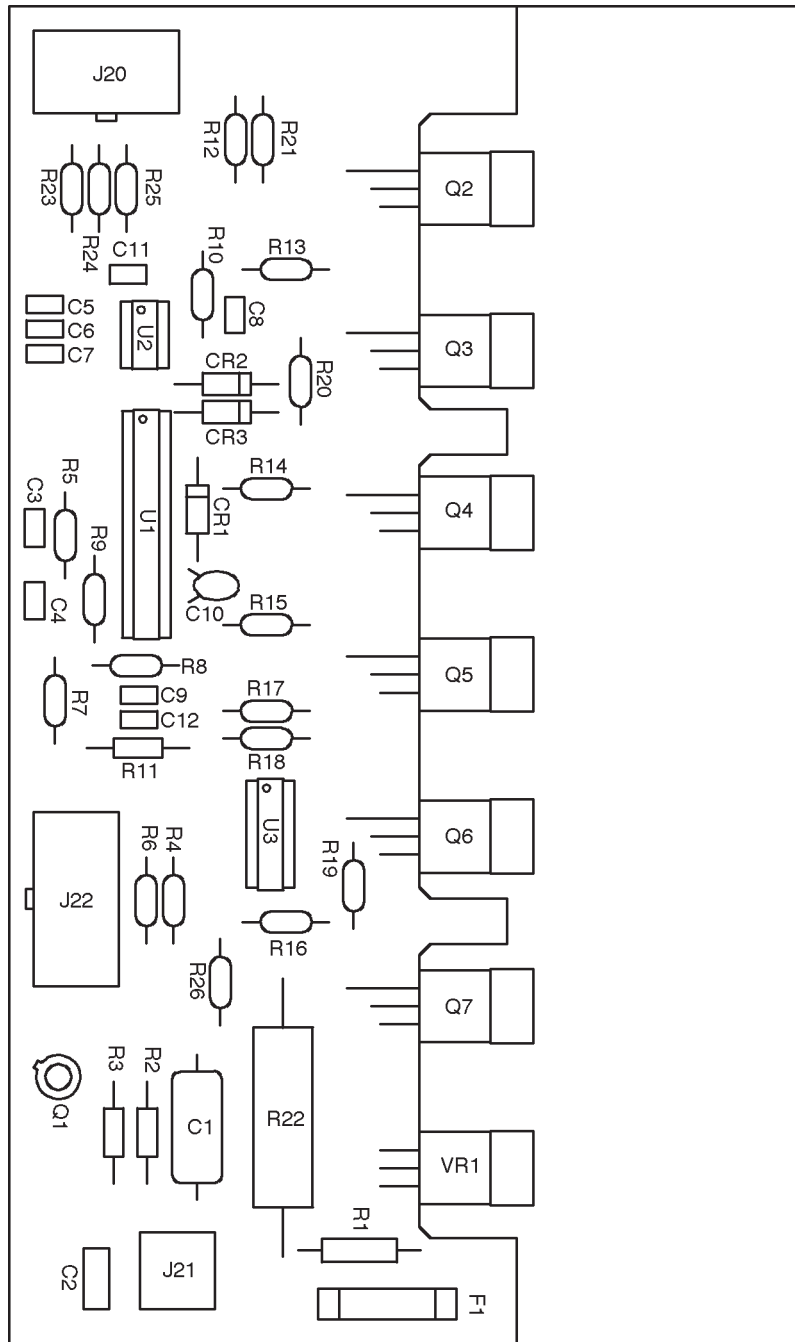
Motor Control Printed Circuit Board Assembly, PN 78230 Revision 4
